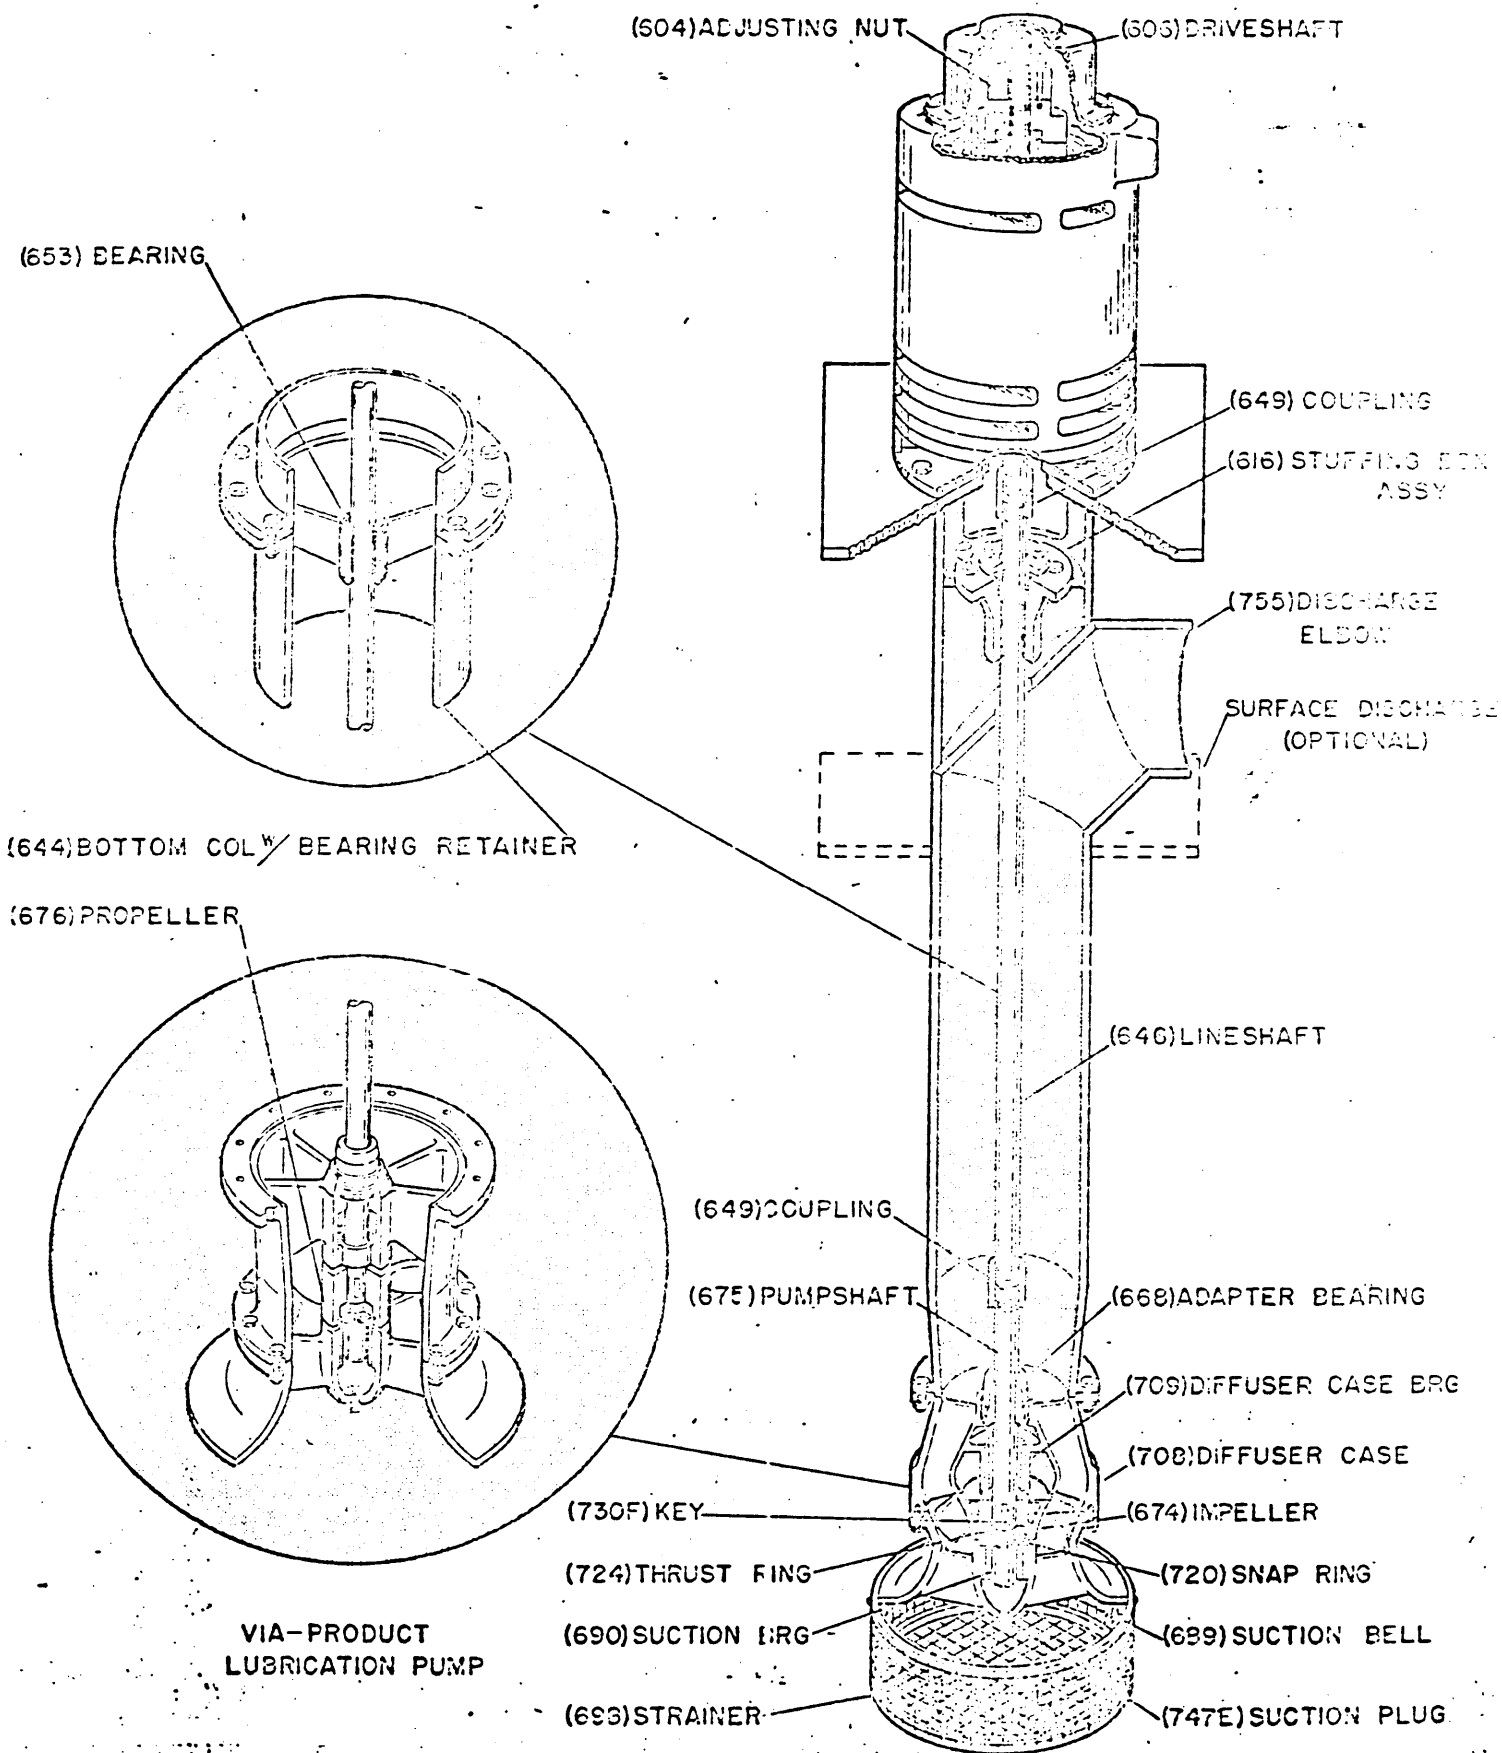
VIM-PRODUCT LUBRICATION PUMP
